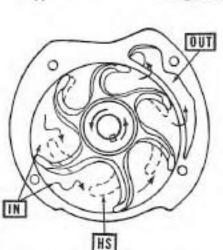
Schematic view of the rubber impeller type water pump used for cooling and for the automatic bailer unit, Impeller blades flex at slow speeds as shown by solid lines. The offset housing causes water to be drawn into pump body (IN) and forces water out (OUT) due to differences in area between blades. At high speeds, blades remain curved as shown by broken lines (HS) and pump operates by centrifugal action.
